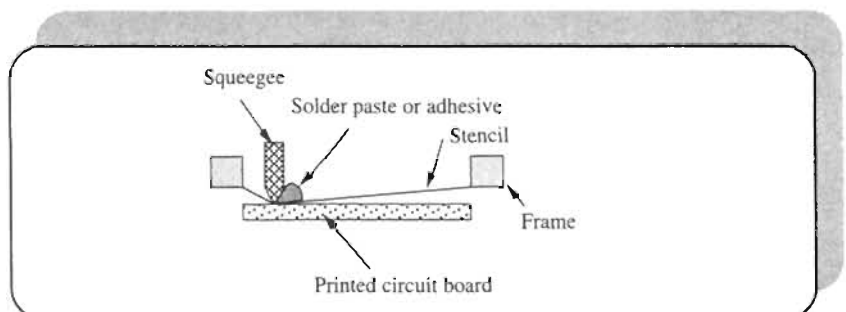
The principle of screen-printing of solder paste or adhesive
